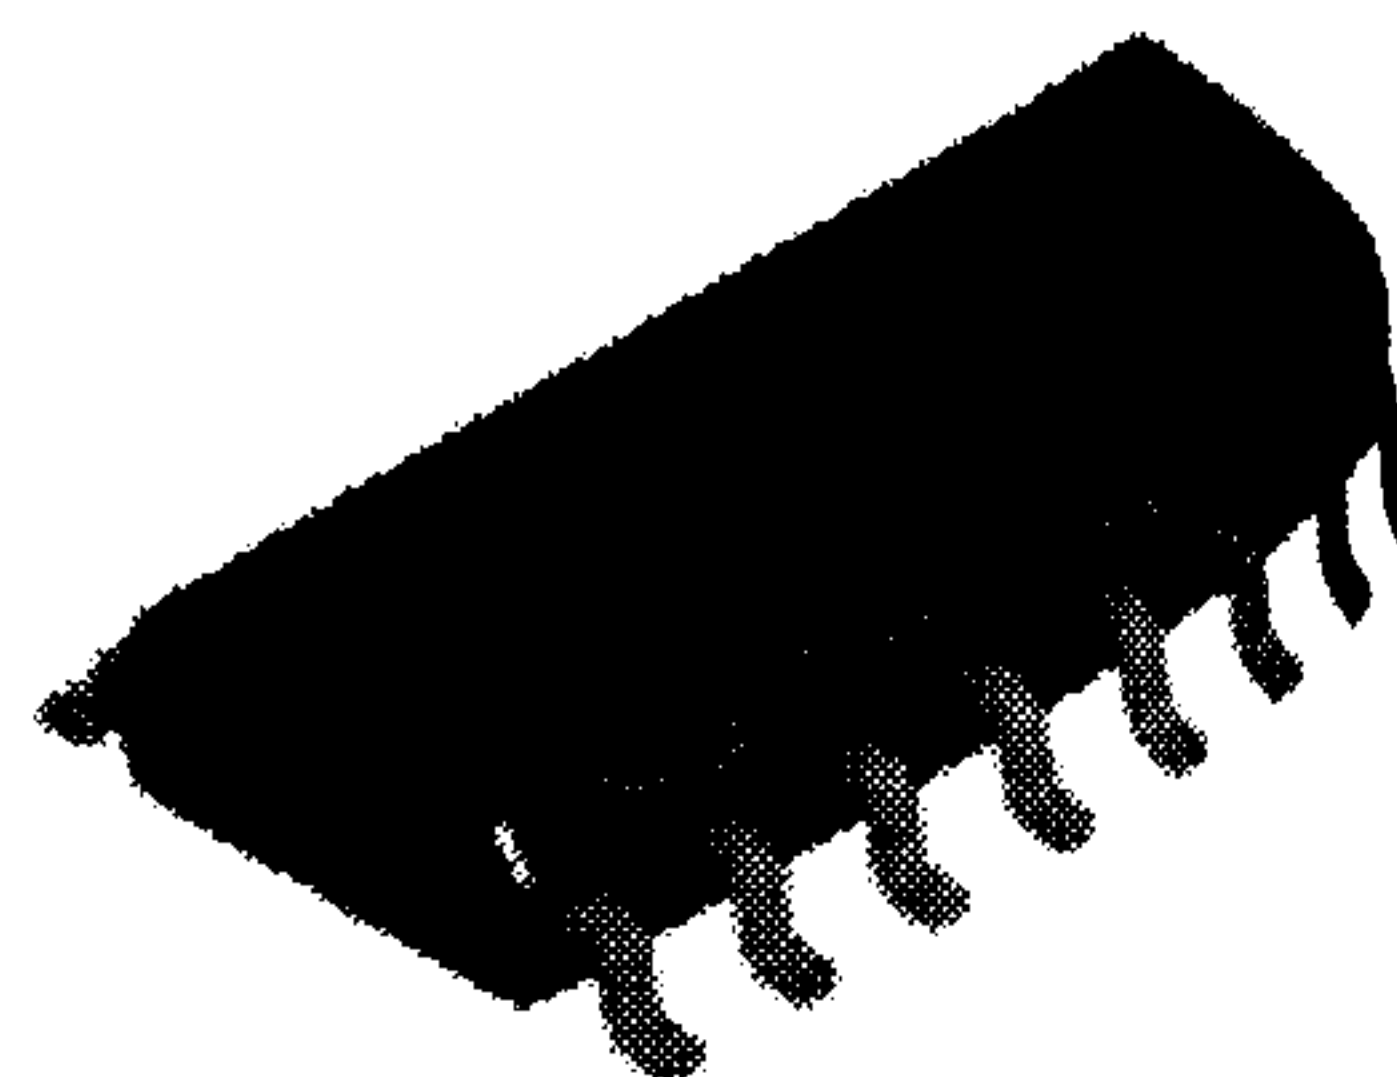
Gull wing configuration on a SOIC chip carrier.
